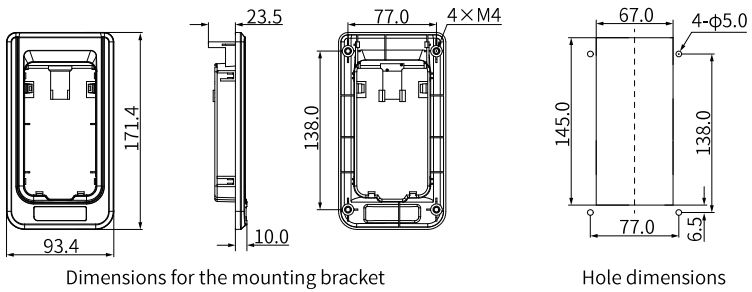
Bracket dimensions and mounting hole sizes (mm) of the MDKE-10
